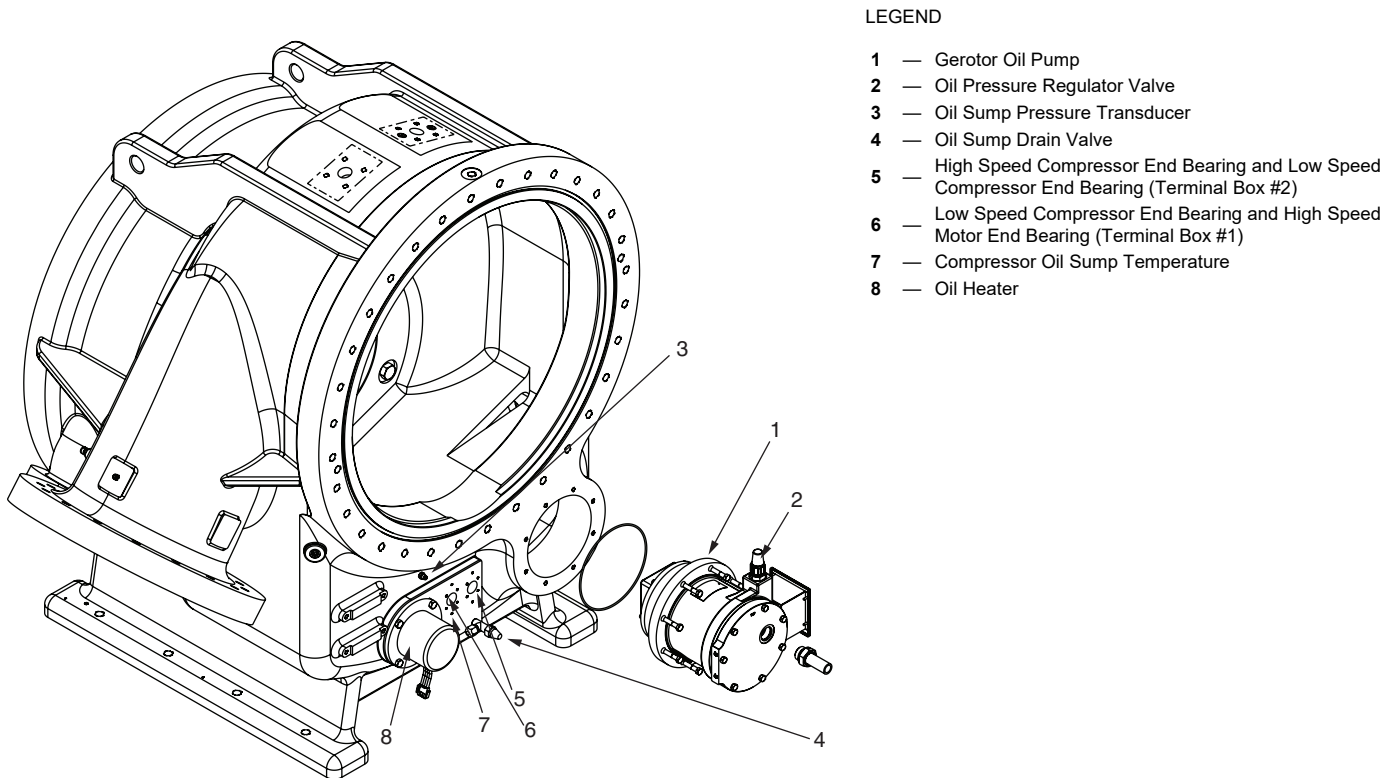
19XR6-7 Gerotor Oil Pump
